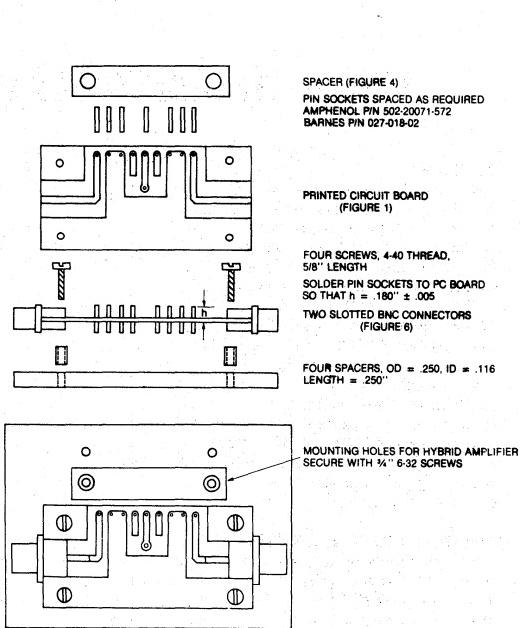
Text Fixture Assembly for Hybrid Amplifiers in Low Profile Package (Case 714G-01)
